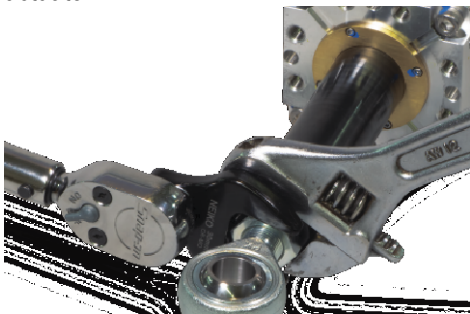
Hold thrust rod stationary using a wrench on the flats of the rod end when attaching accessories, linkages or load to the actuator. Two wrenches are used here: The silver wrench prevents the thrust rod from rotating, the blue wrench will fasten the spherical rod eye option to the actuator rod end.
